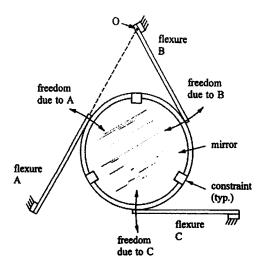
Concept for a flexure mounting for a circular mirror.
